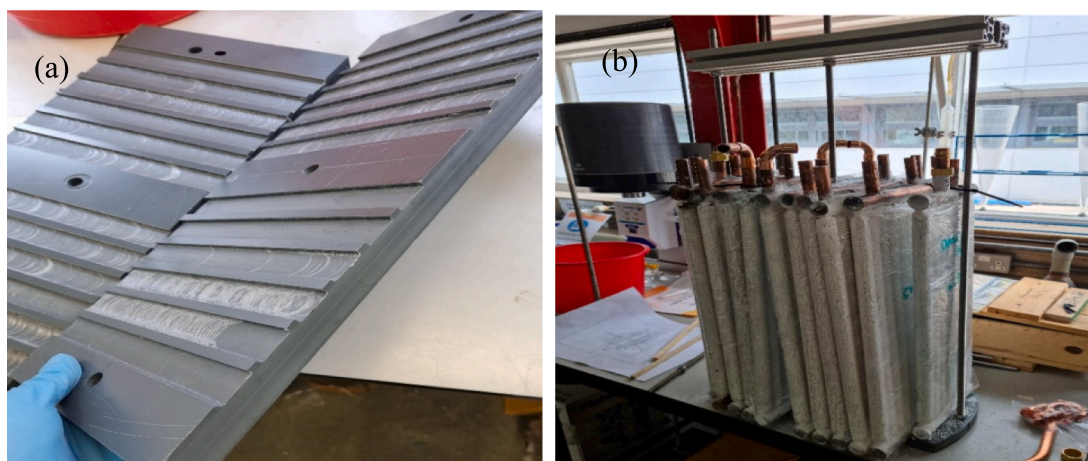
(a) Plastic carrier of the heat exchanger and (b) Connecting the coated wire finned tube heat exchanger modules by soldering.
